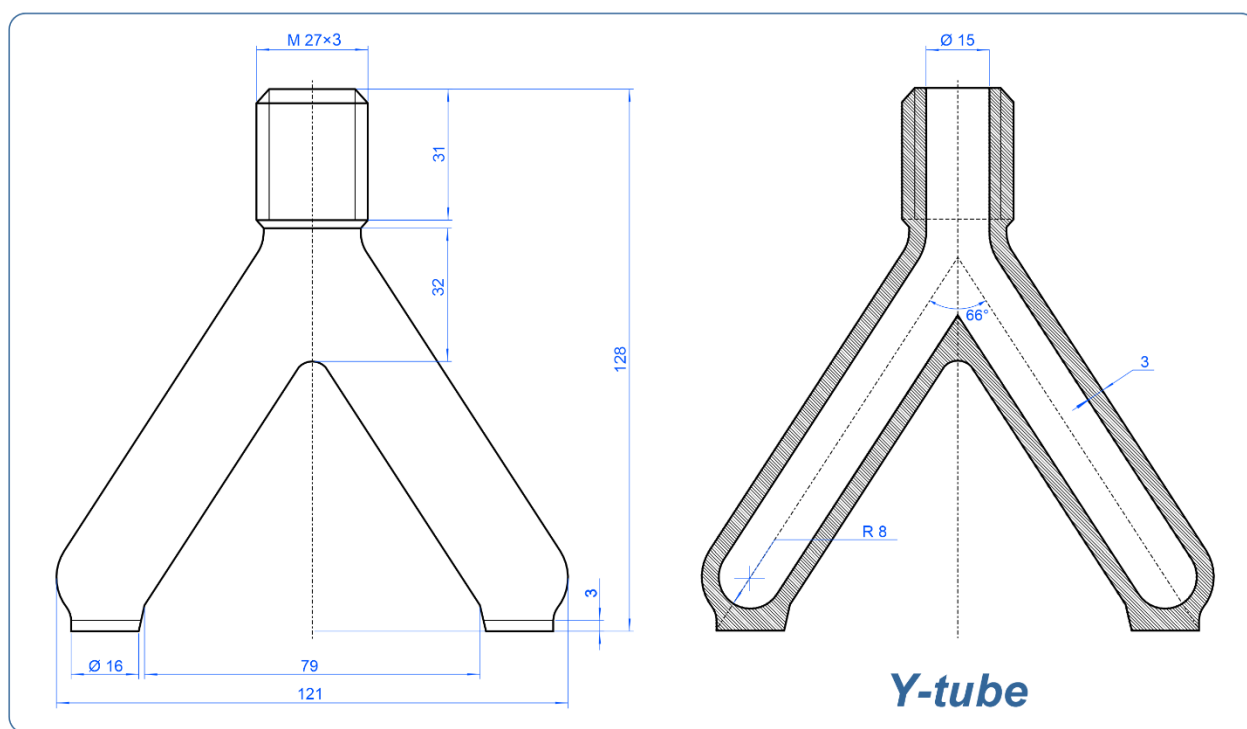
Drawing of the Y-tube type 2 reactor vessel.
